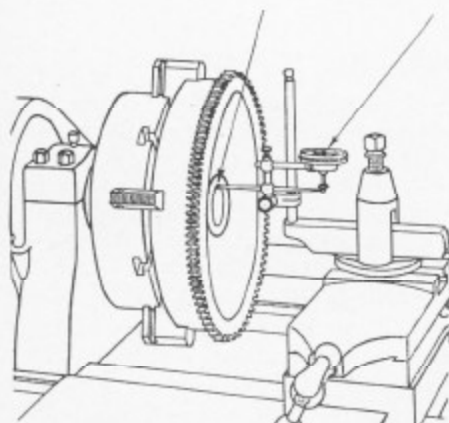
Testing the Bore of the Flywheel to Determine if the Wheel is Running Concentric with the Axis of the Crankshaft
